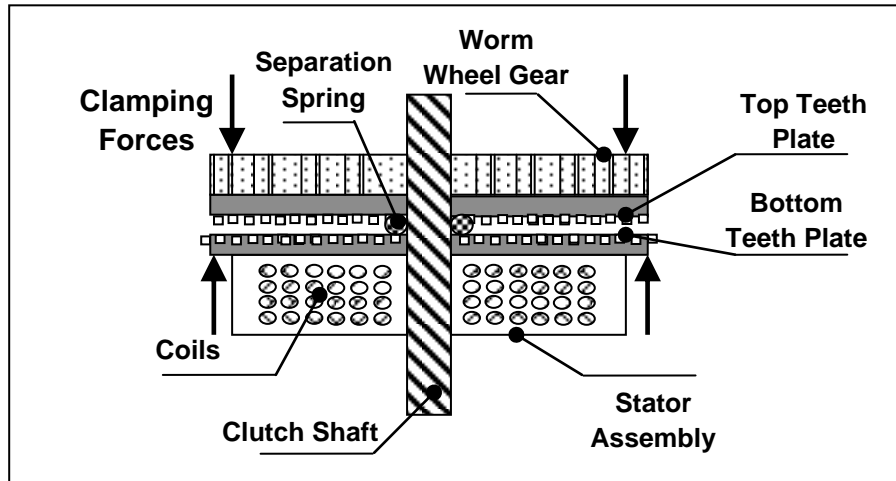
Cross Section of the GM-T Series Electromagnetic Clutch Mechanism
